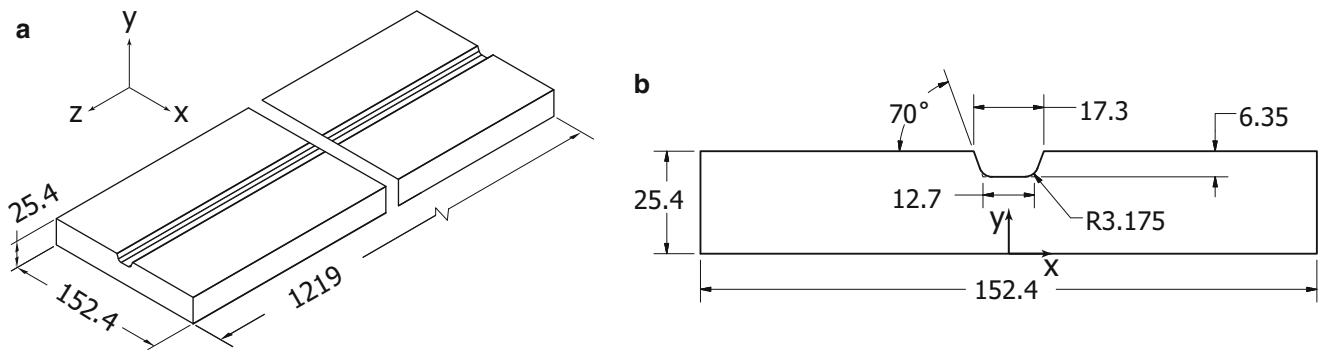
Diagram of stainless steel weld plate (a) overall geometry and (b) cross-section with details of the machined groove. Dimensions are in mm
